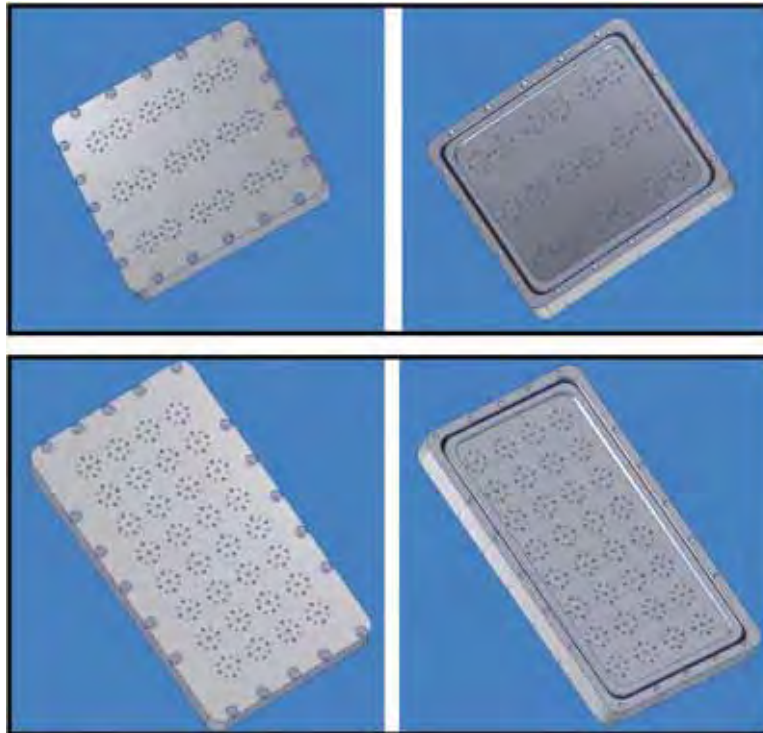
Examples of single mechanical flange with 18 vacuum waveguide feedthroughs for 3x3 array (top panels) and with 32 vacuum waveguide feedthroughs for 4x4 array (bottom panels). The images on the right panels show the channel for the vacuum-seal O-rings surrounding the waveguide feedthroughs.
